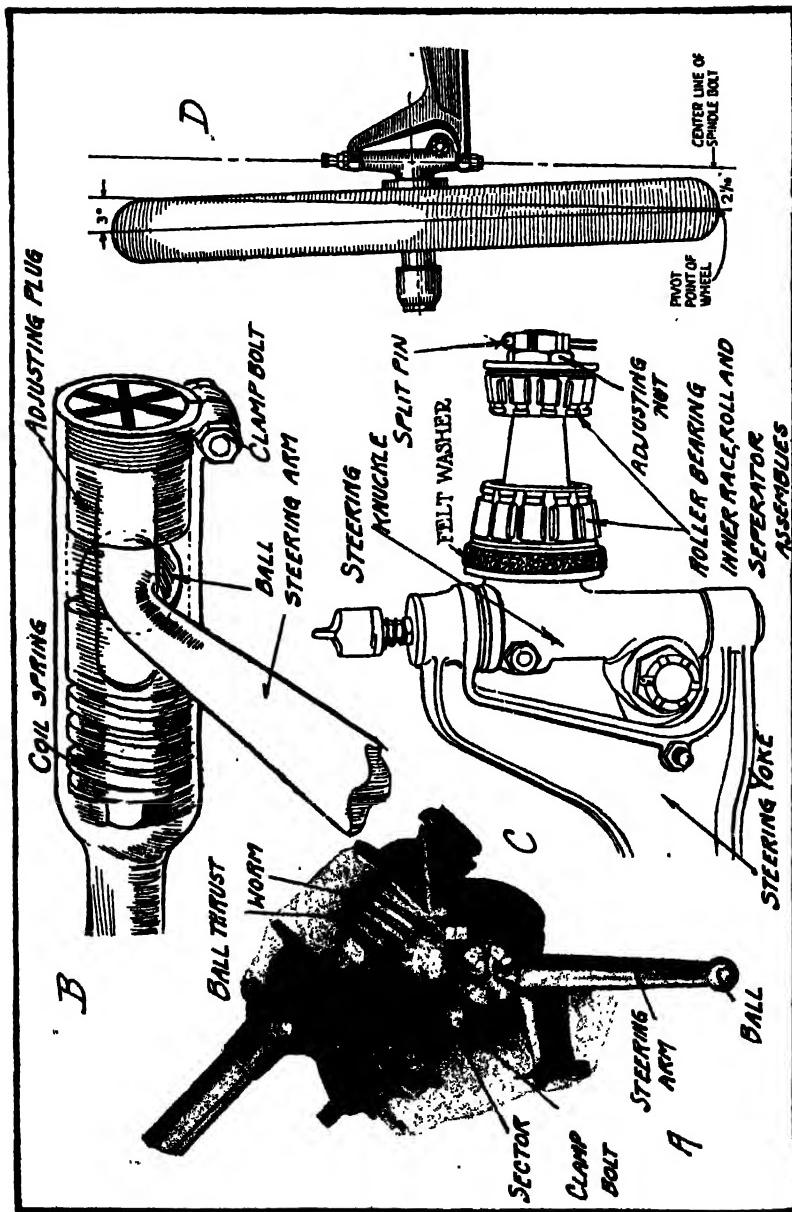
Showing Parts of Automobile Steering System that Demand Inspection when Overhauling.
